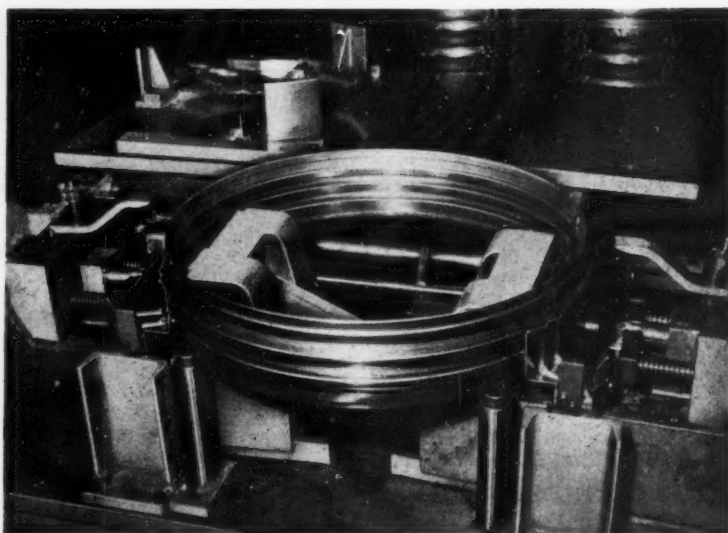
Hydraulically-operated Punches Pierce Holes in the Welded Assembly. The Checking Fixture may be Seen in the Background
